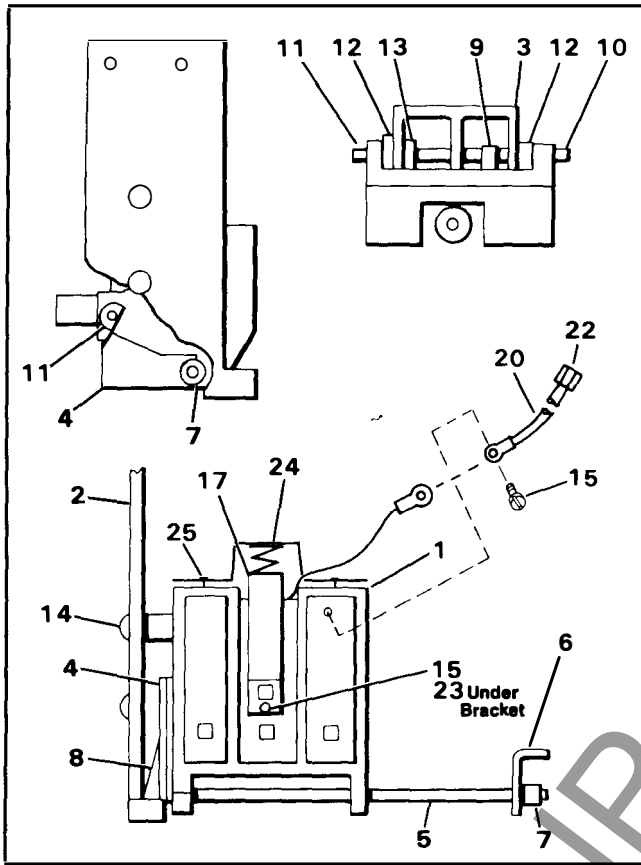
Blown Fuse Trip Assembly 18-399-805-501
